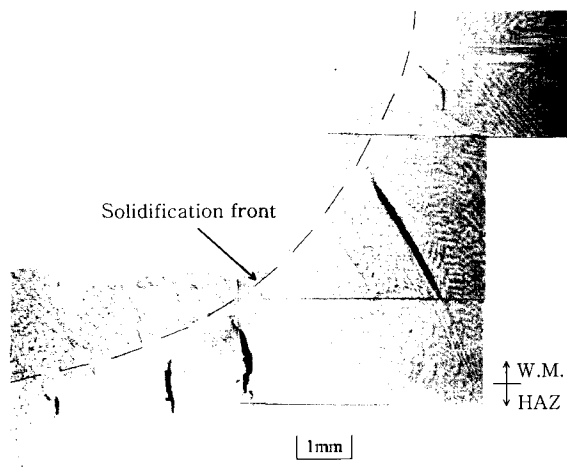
Typical example of optical microstructure showing hot cracks in Inconel 690(SAW) specimen
